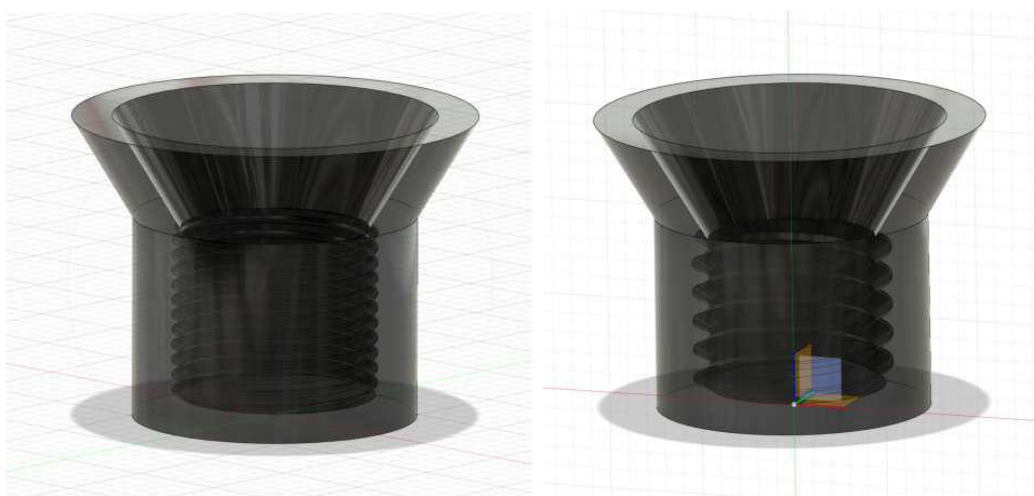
Digital designs of the molds of screws with two different thread pitches (1 and 2 mm).
